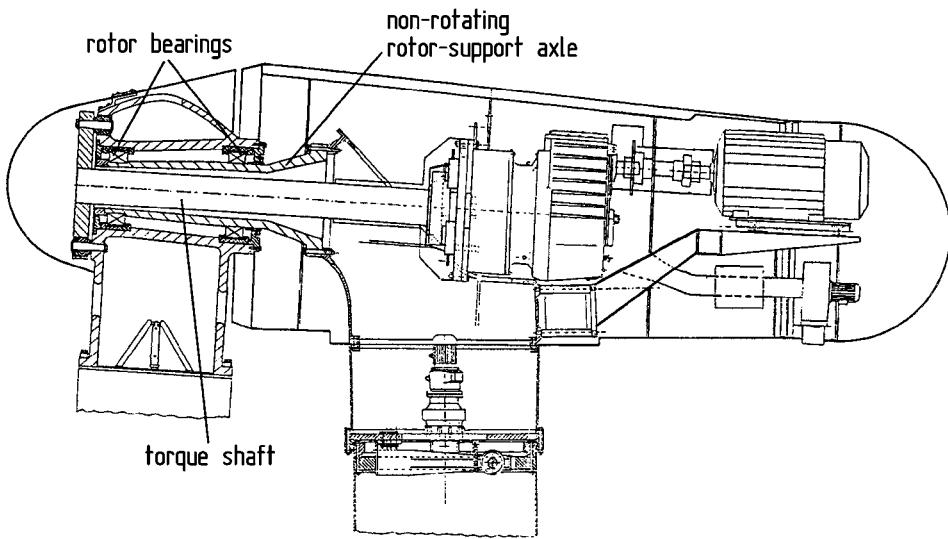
Rotor bearing assembly on a fixed support shaft in the BONUS Mk V turbine
